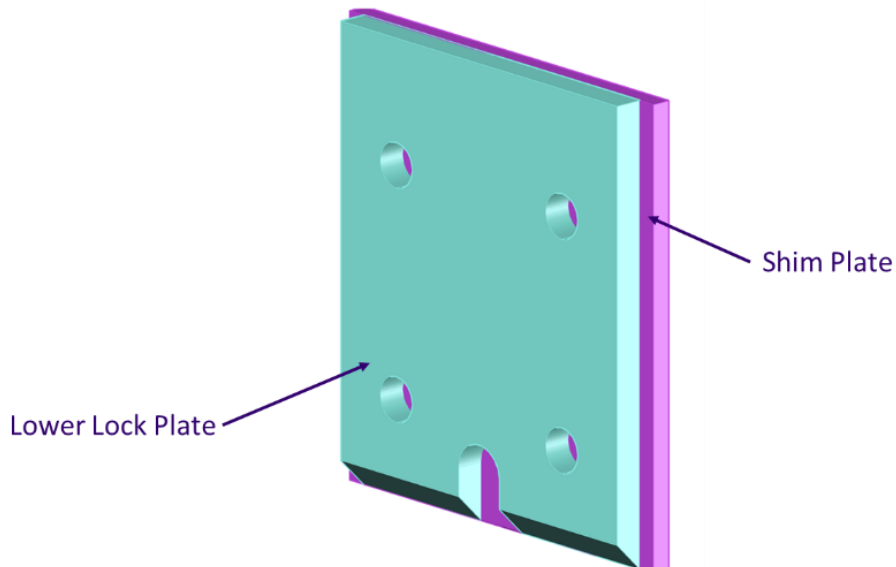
Assembly of the *LLP* welded to the *SP*.
